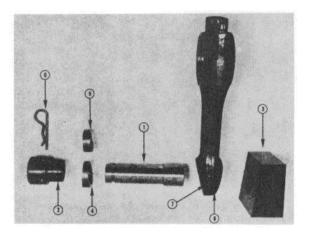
C-32. Piston Pin and Bushing Mandrel Set
